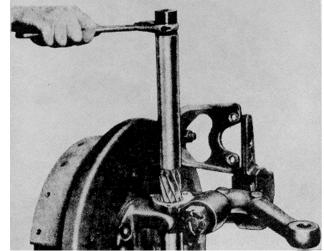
D-9. Ream Lower Bushing Second - Type 1A
